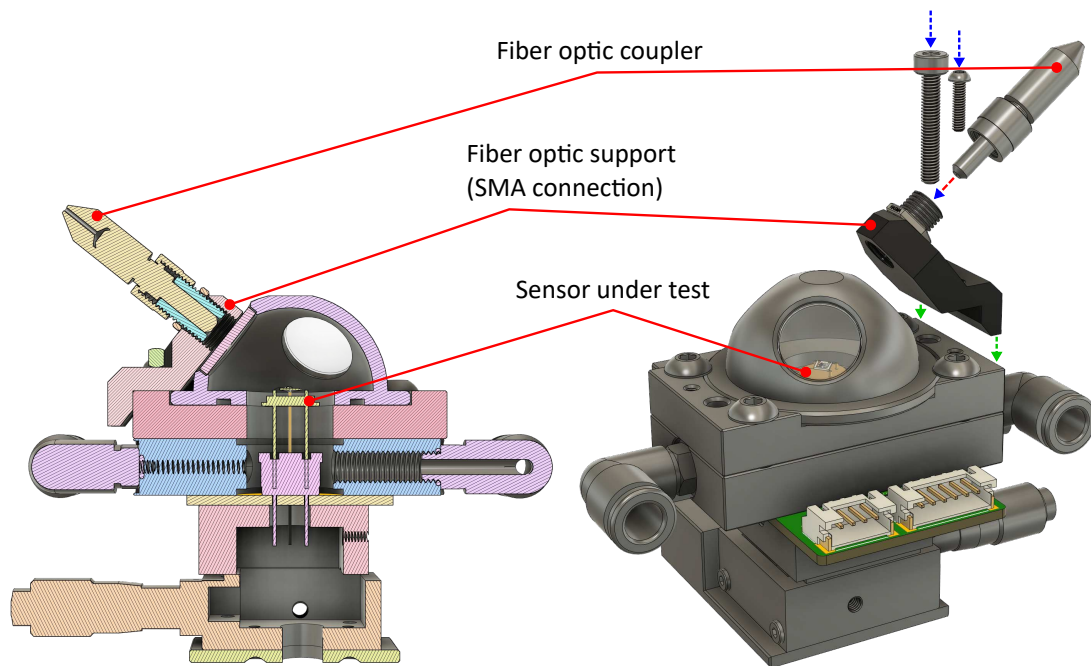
The figure shows the section of the measuring chamber with the mounted accessory (left) and the project exploded (right). The support is 3D printed in standard resin using SLA technology.
